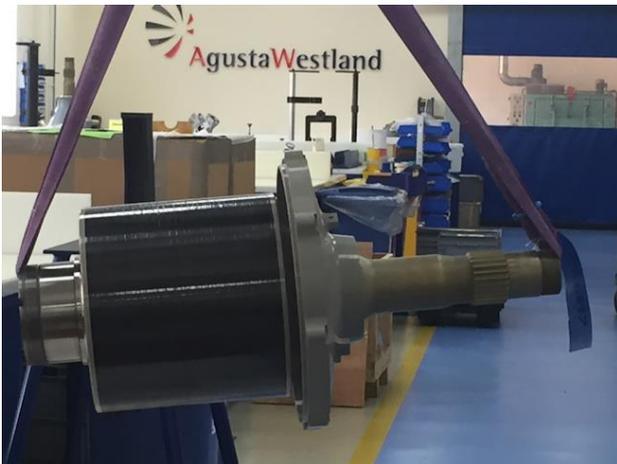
Completed rotor with front end cap fitted to rotor shaft
